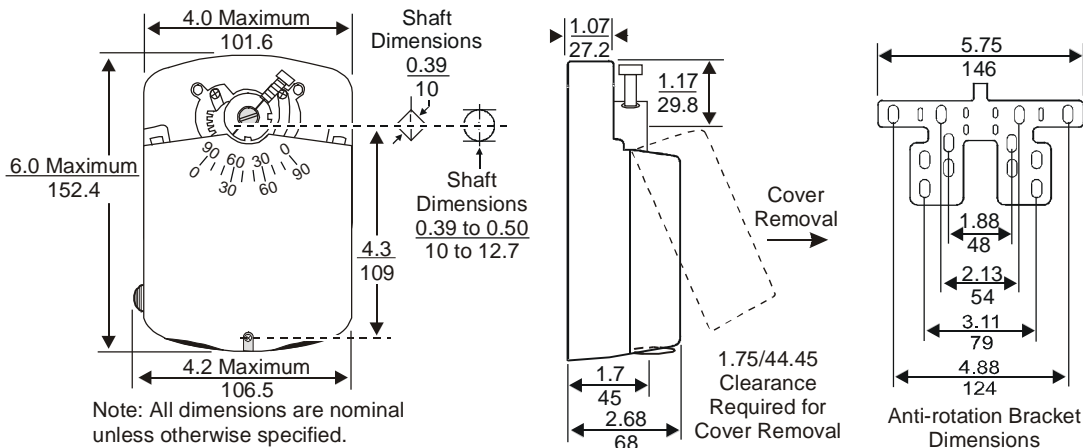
Actuator and Anti-Rotation Bracket Dimensions, in. (mm)
